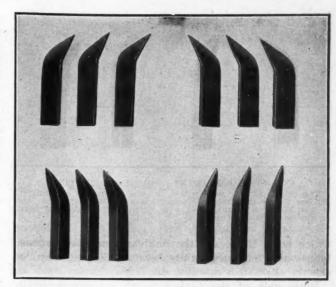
PICK POINTS FOR CUTTING MACHINE
